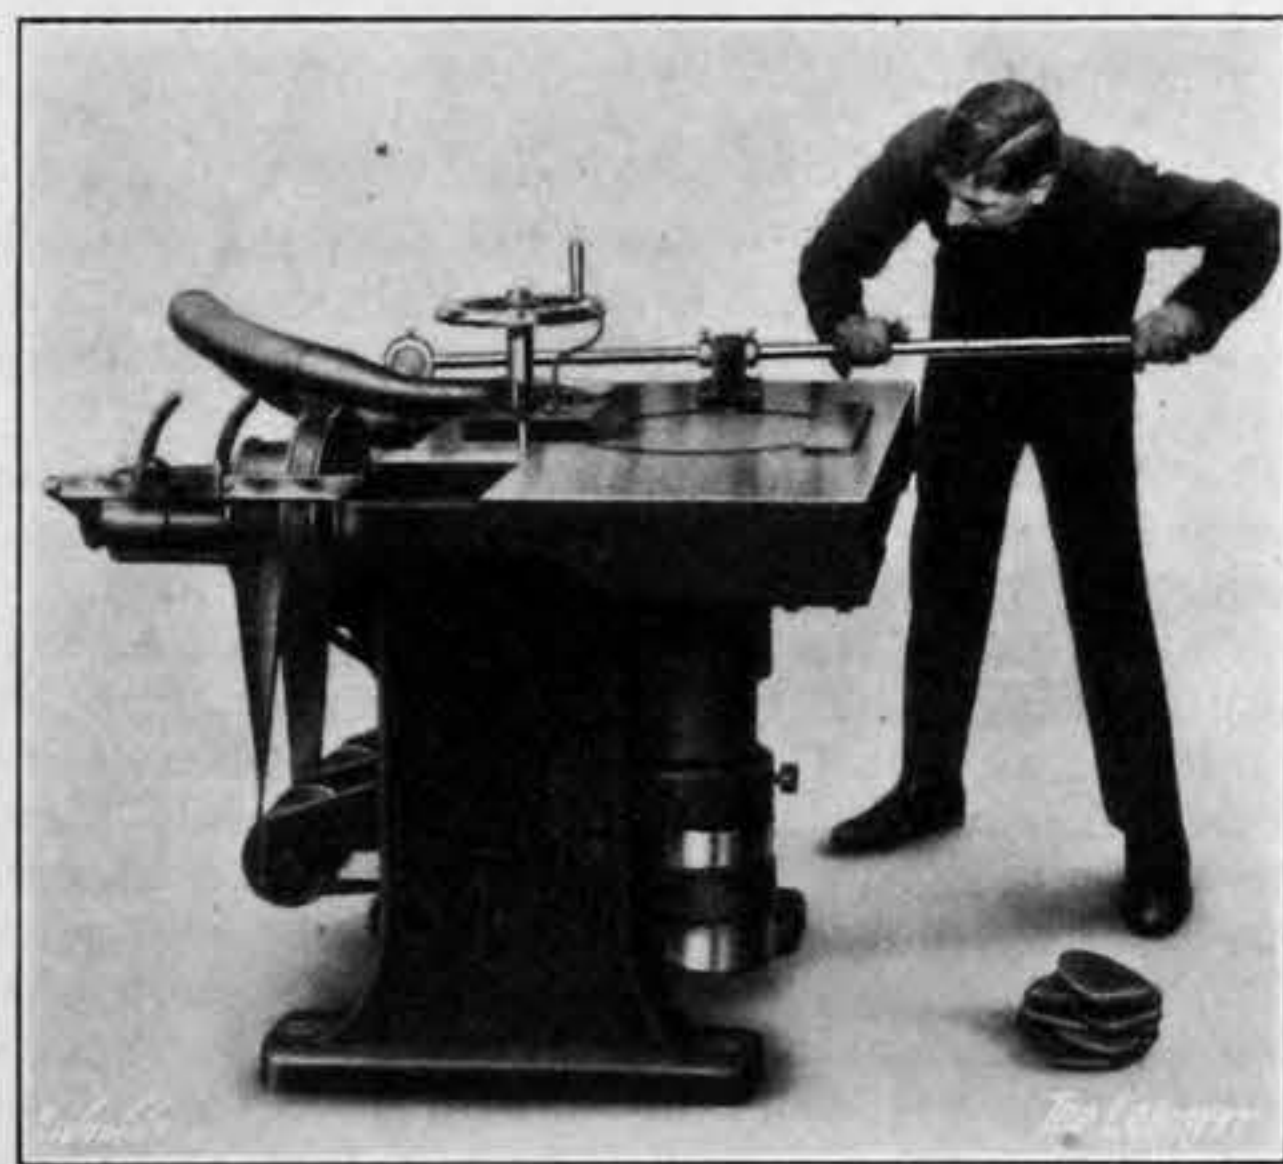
SURFACE GRINDER—JACKSON AND HUNT
